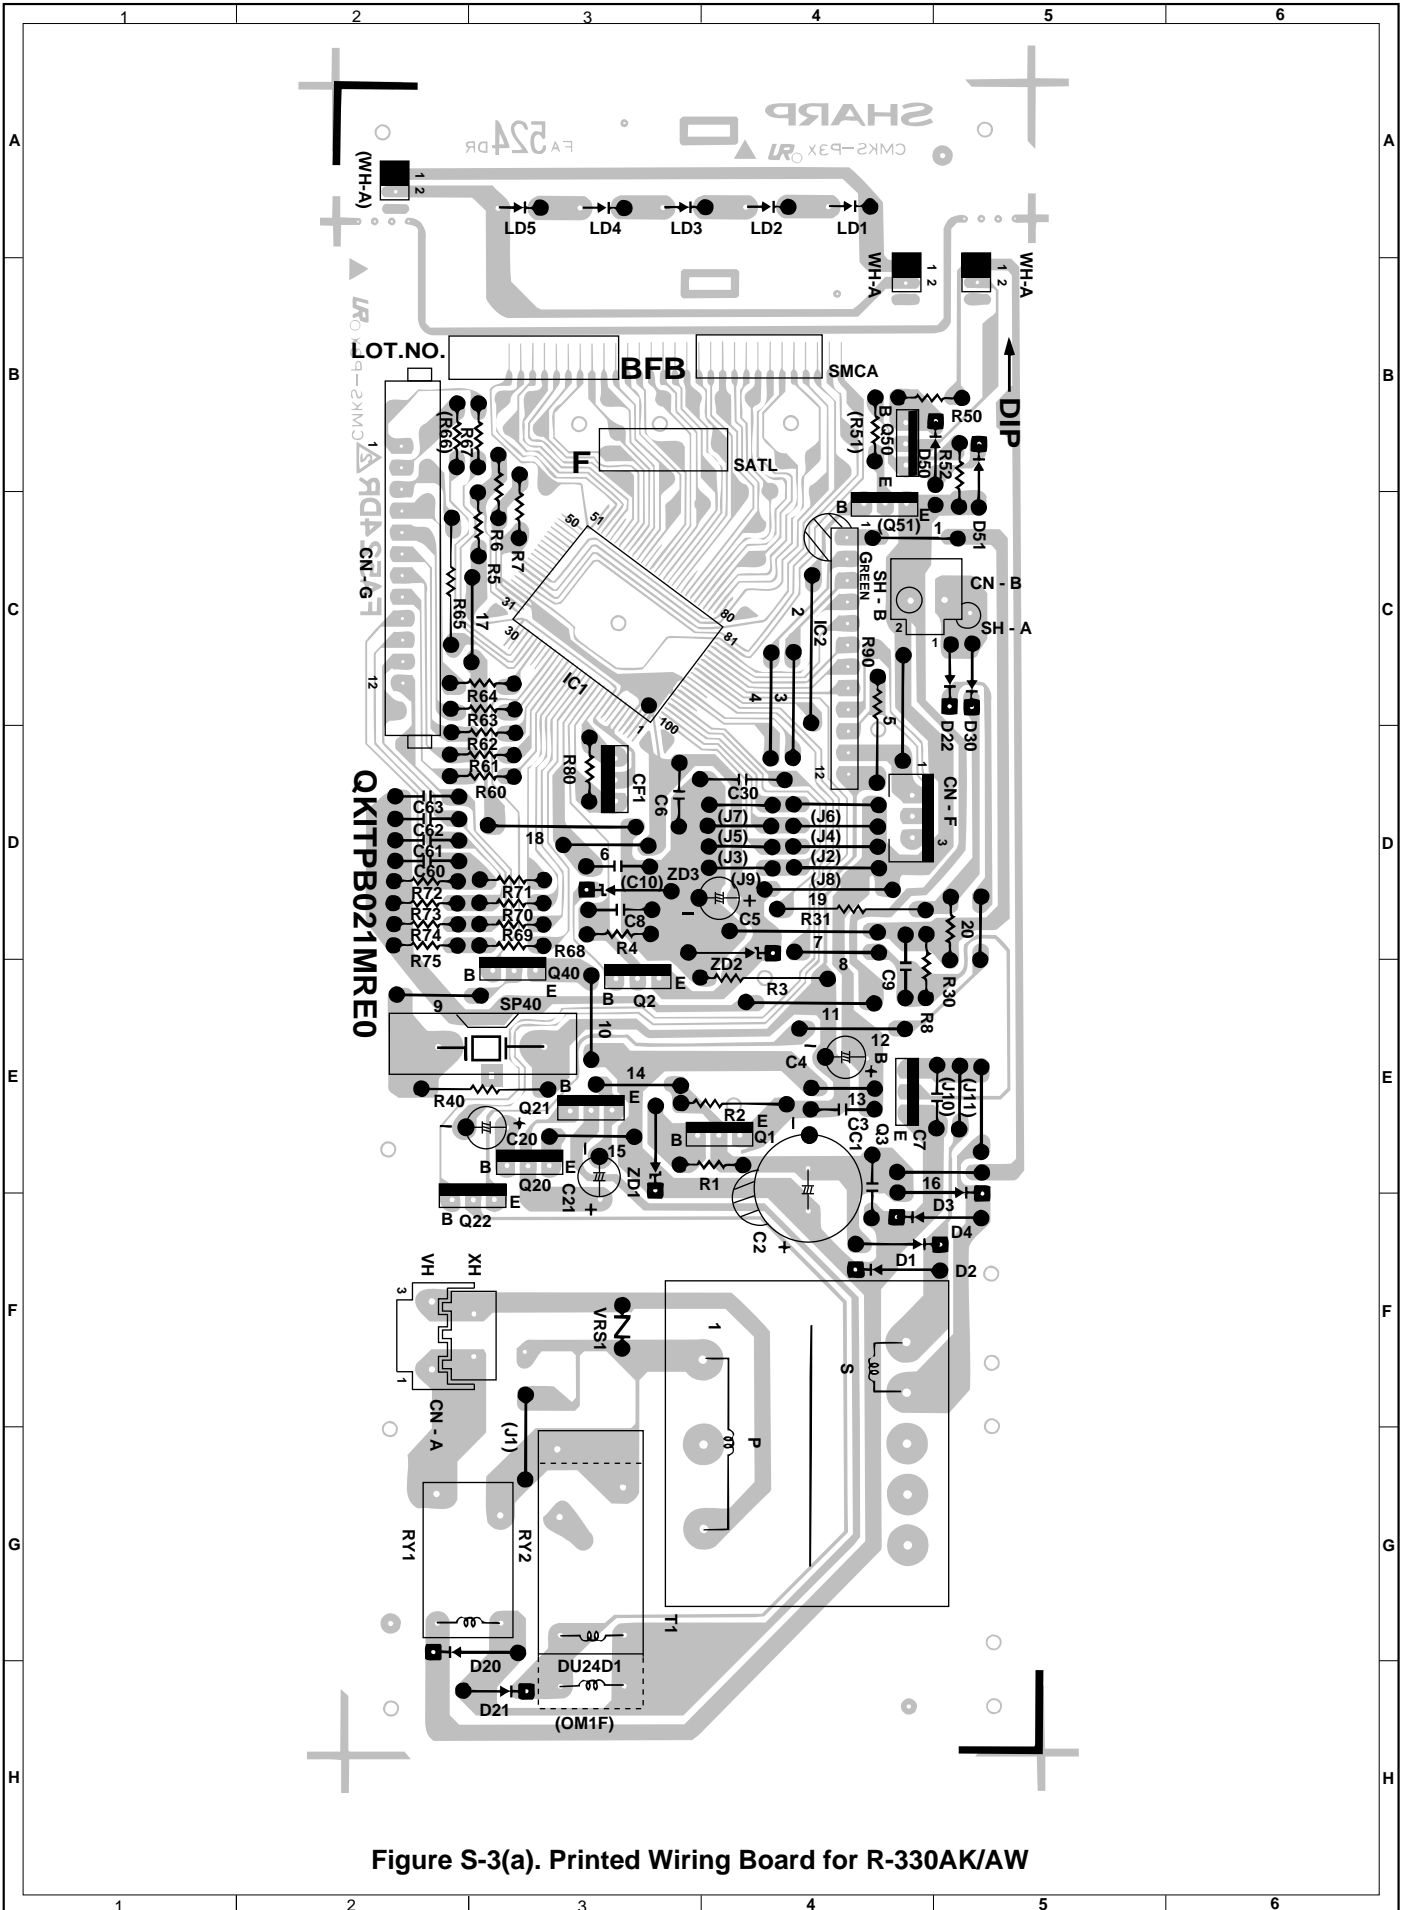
(a). Printed Wiring Board for R-330AK/AW
